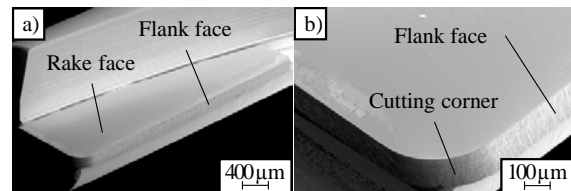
Milling cutter geometry a) Tool faces and b) Cutting corner
